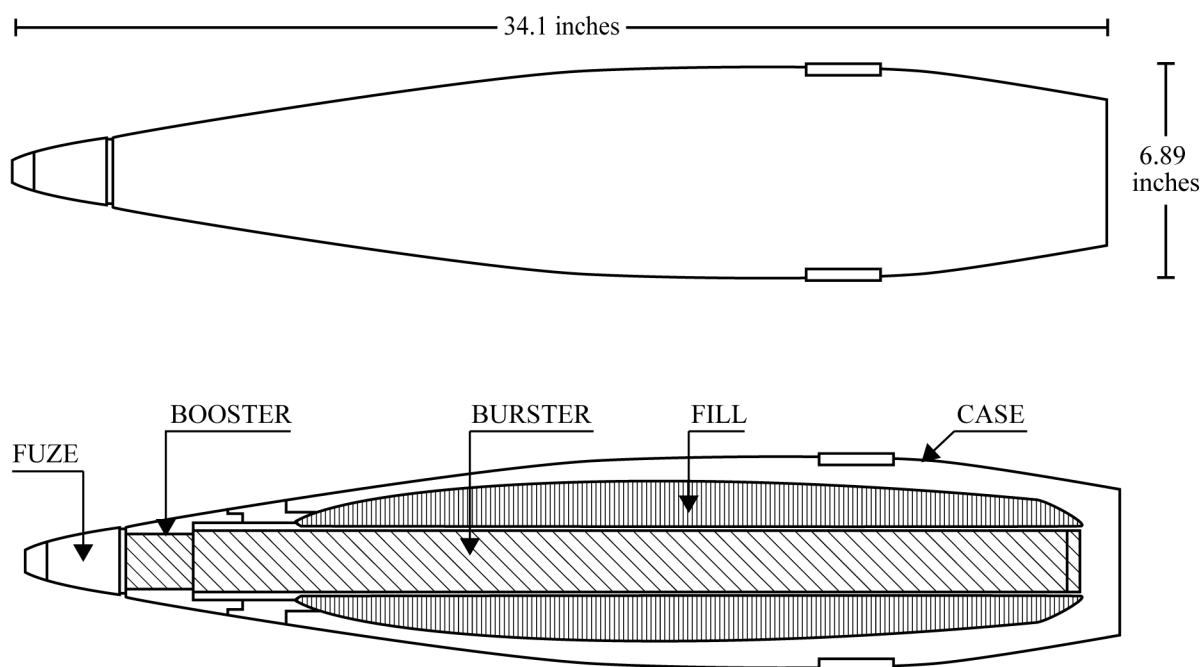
Projectile, 175-mm, Gun, T223 - Line Drawing
